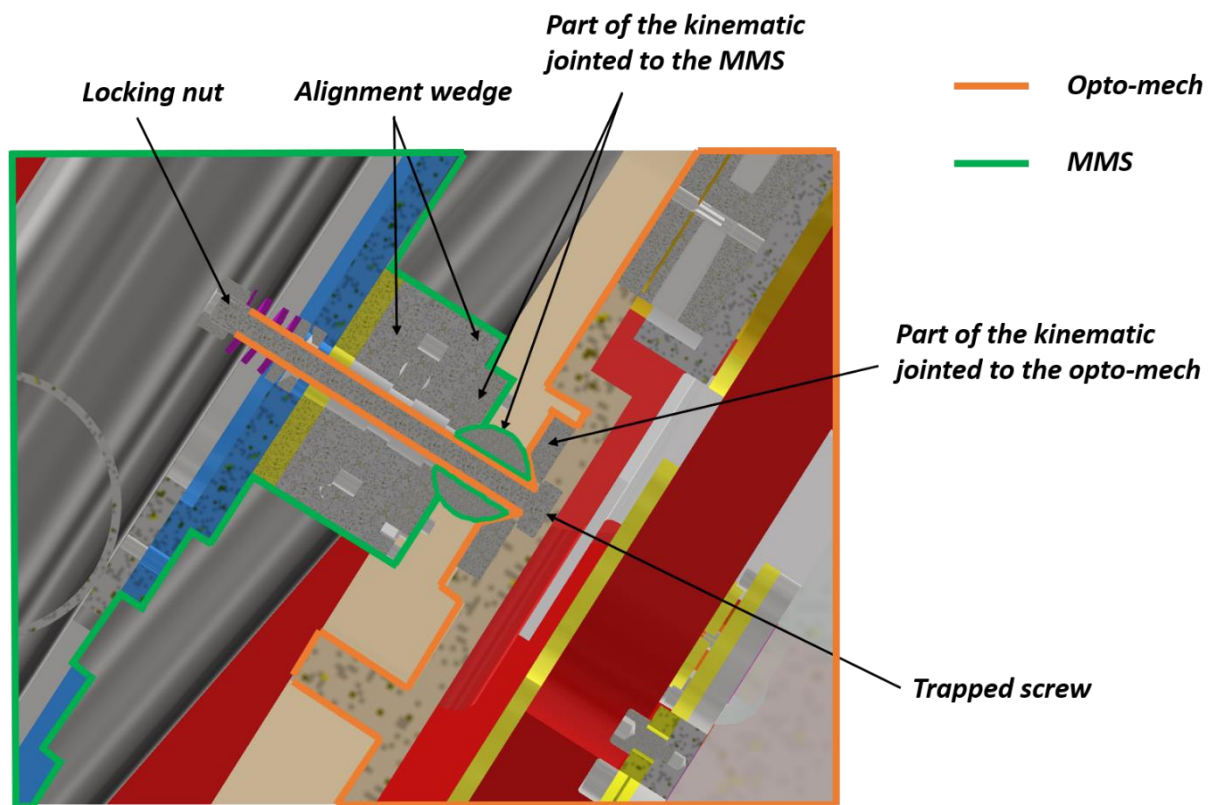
section view of one kinematic mount on the back surface of a subsystem (M6 in this case). The fixing screw is trapped in the opto-mech, and it is locked by a nut at the opposite edge of the screw. Bordered in green, the parts mechanically jointed to the MSS (fixed), bordered in orange the parts jointed to the subsystem (movable). The nut is positioned by an operator when all the 3 fixing screws are inside their kinematics.
